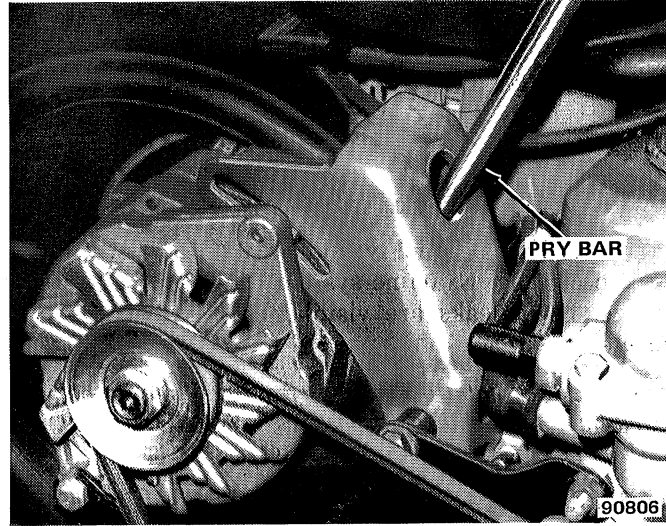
C-17 Four-Cylinder Engine Alternator Drive Belt Adjustment
